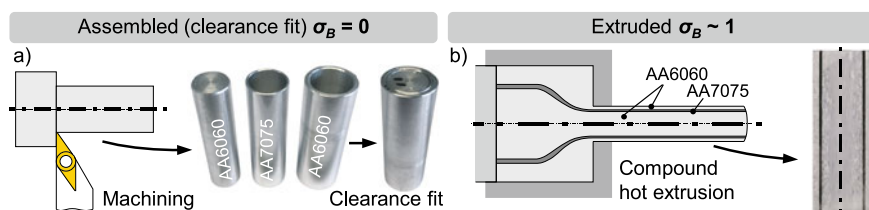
Billet preparation by a machining with clearance fit and b extrusion with bonding
